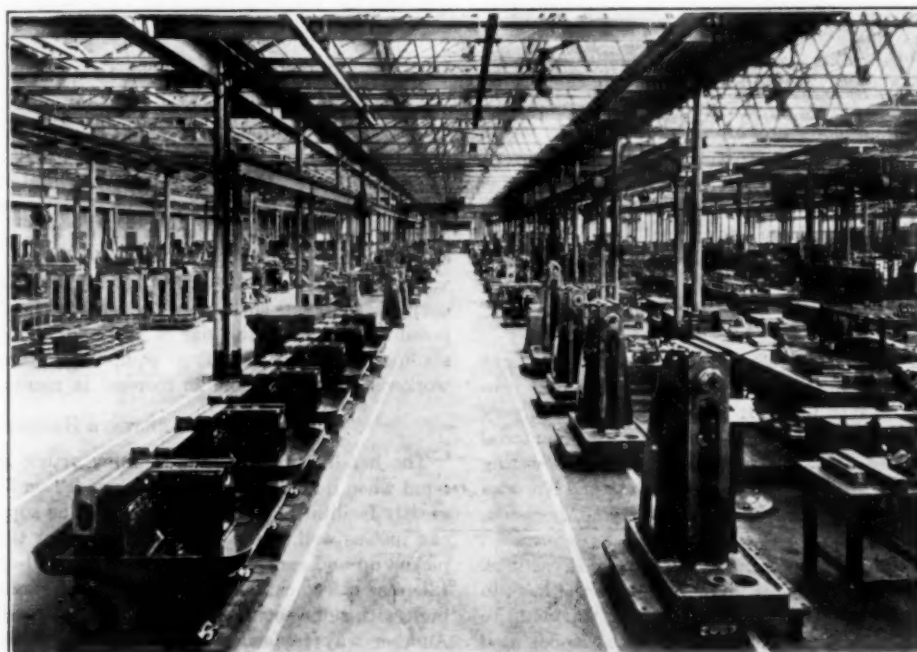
THE CINCINNATI MILLING MACHINE COMPANY HANDLES ITS CASTINGS ON LIFT-TRUCK SKIDS FROM THE TIME THEY ARE RECEIVED UNTIL THEY ARE SHIPPED AS COMPLETED MACHINES. THE ASSEMBLY FLOOR IS SHOWN IN THIS PHOTOGRAPH
